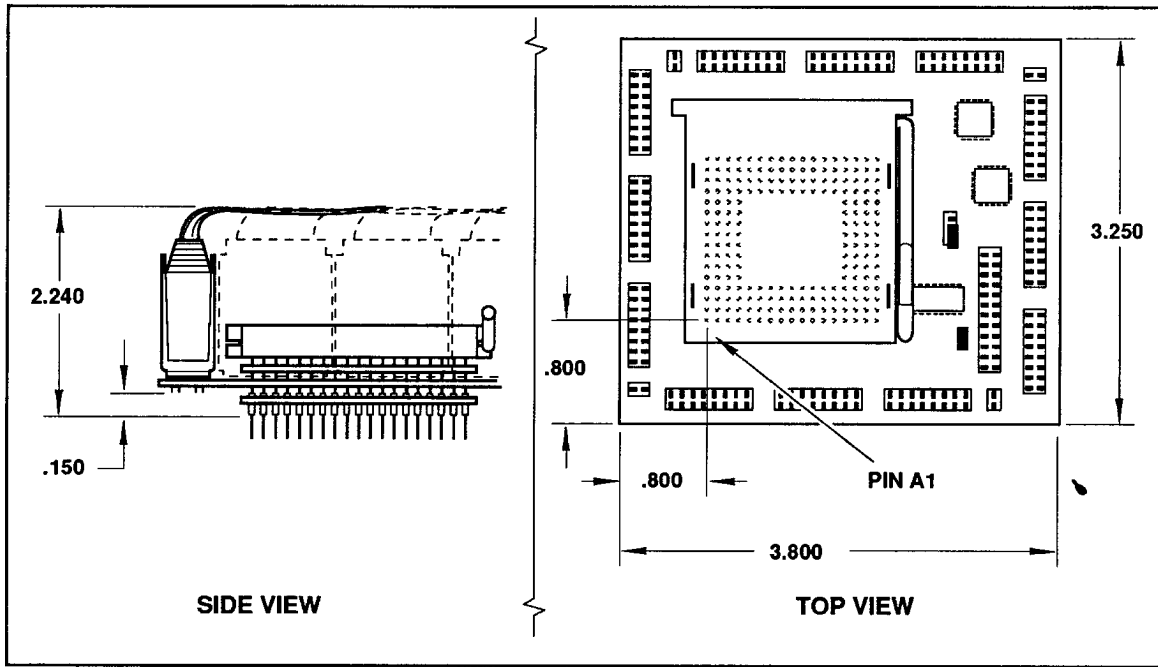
Minimum Clearance of the standard probe adapter with 8-channel probes attached.
